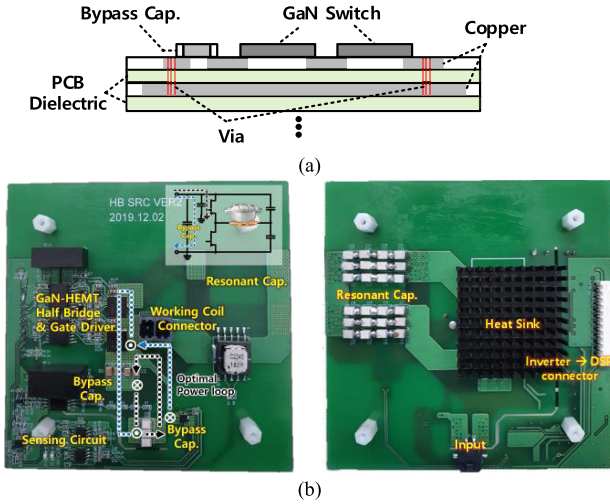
PCB layout design. (a) PCB layout with optimal power loop. (b) Designed PCB layout.
